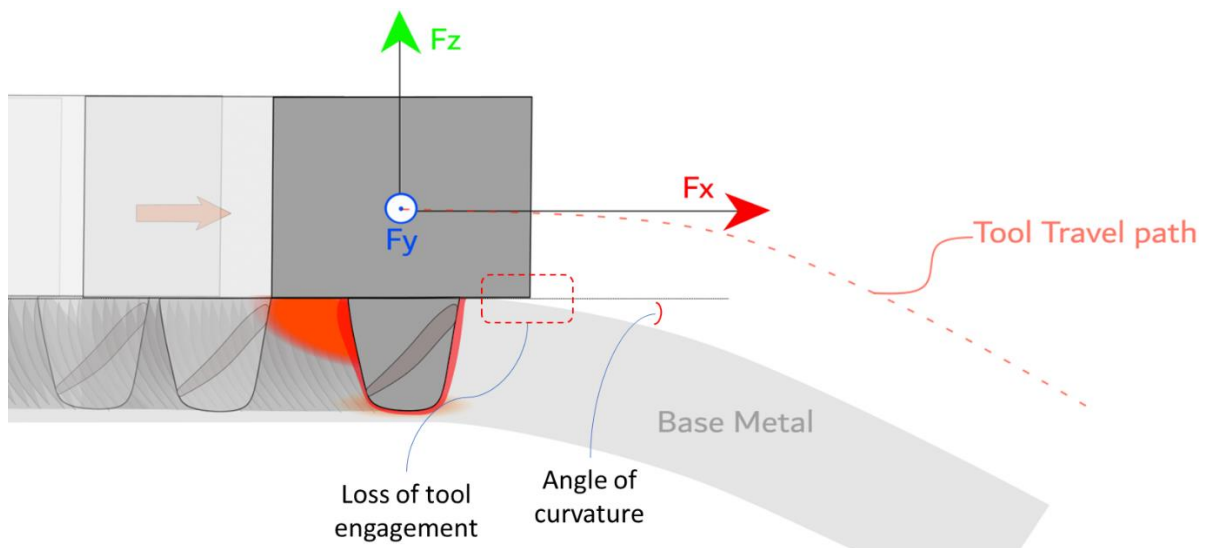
Loss of tool engagement while welding surfaces with curvature inwards to a straight line
